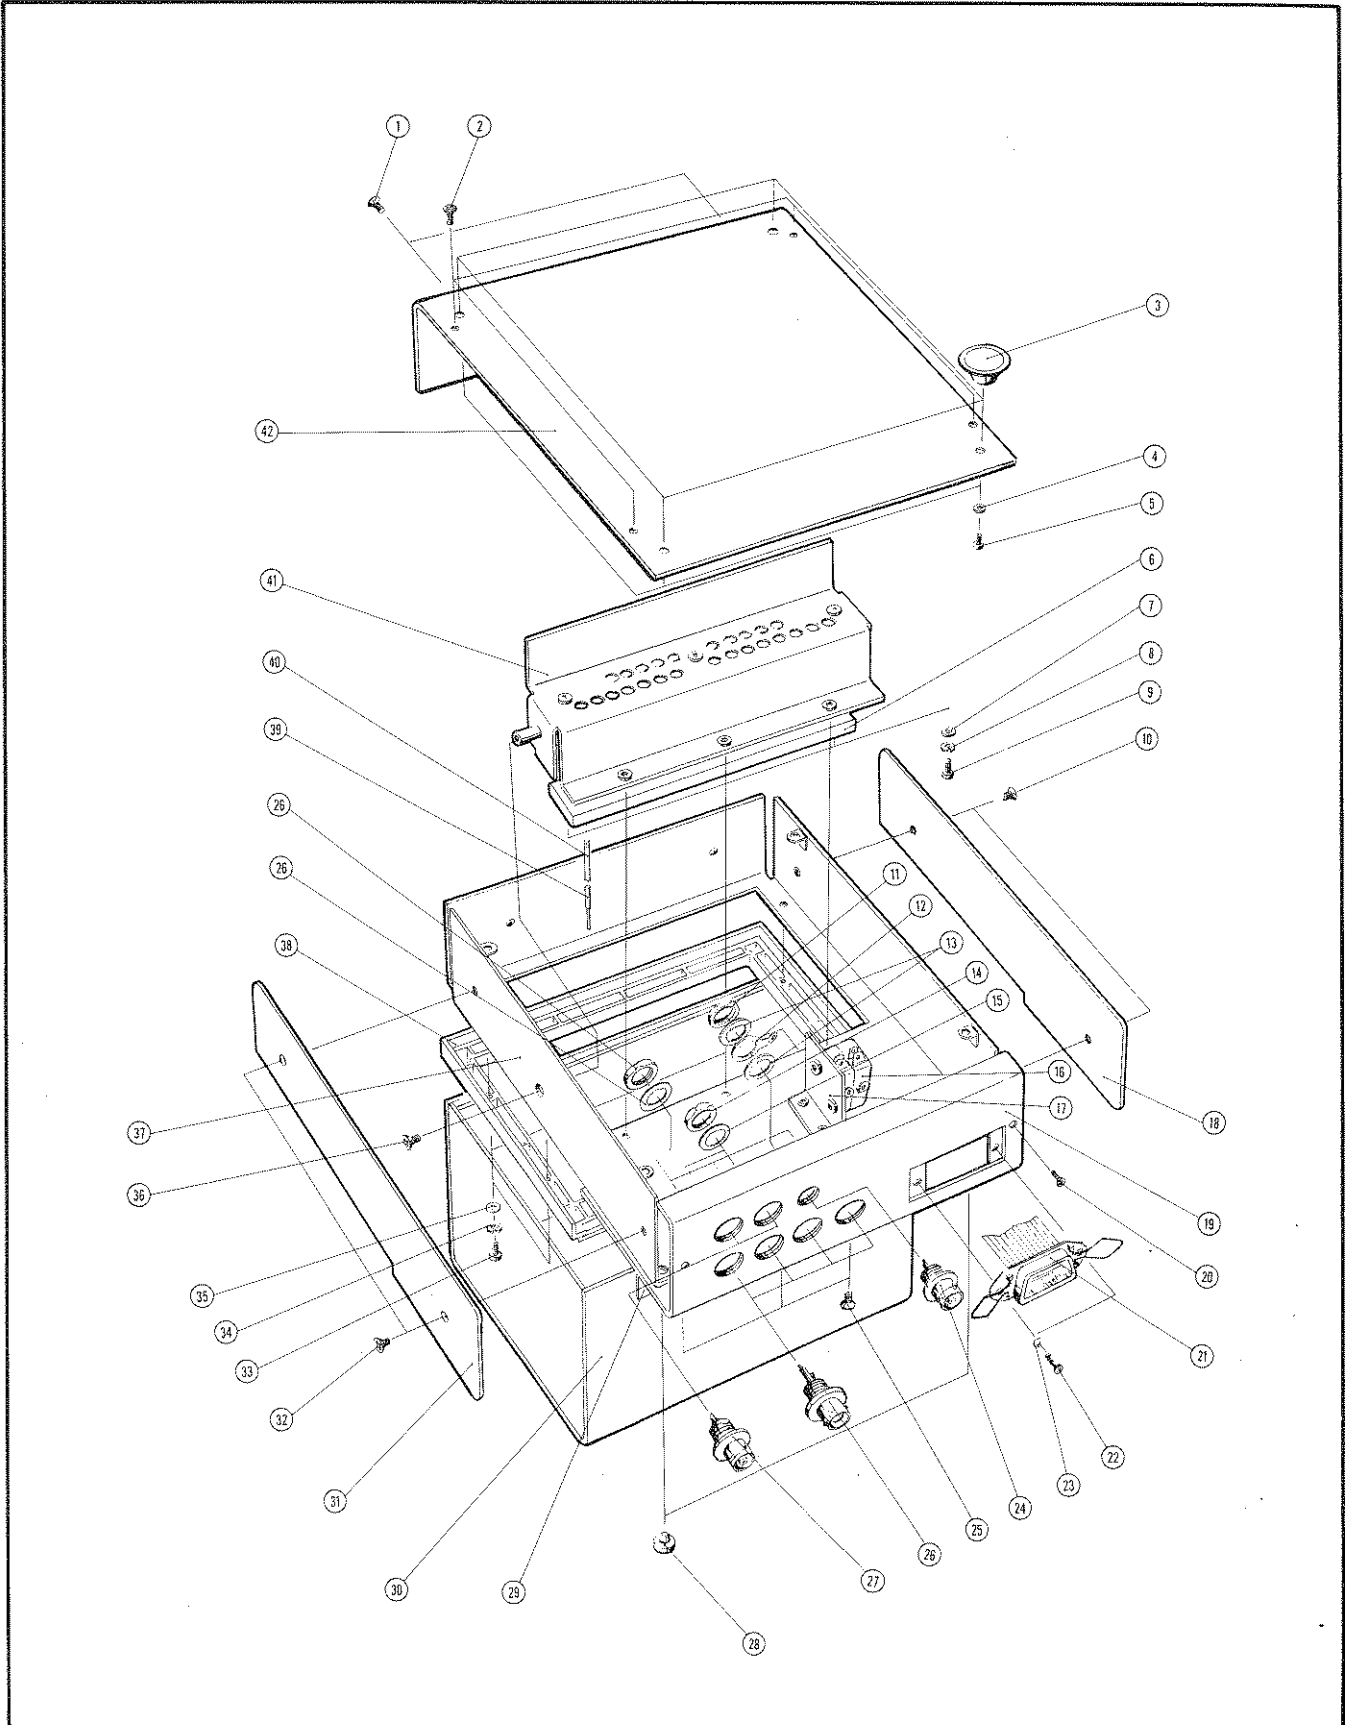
16058A Exploded View (Sheet 1 of 2).
